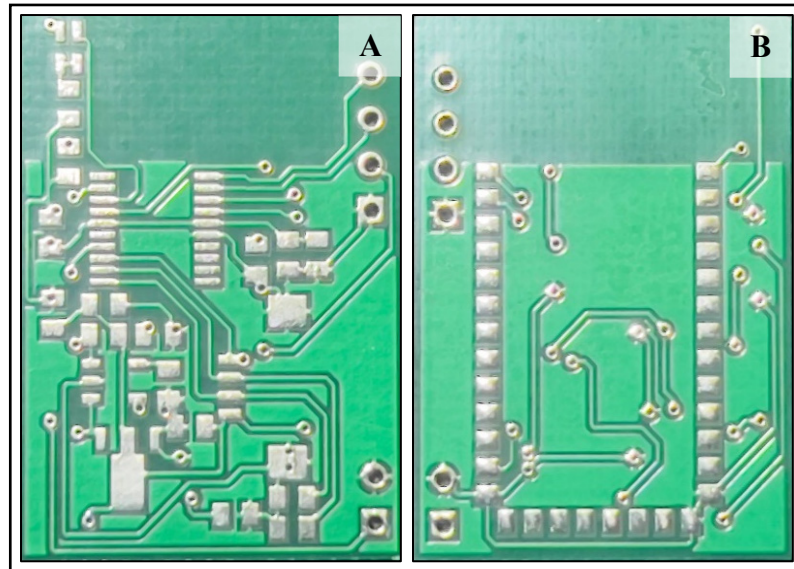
Remanufactured PCB: (A) front, (B) back
